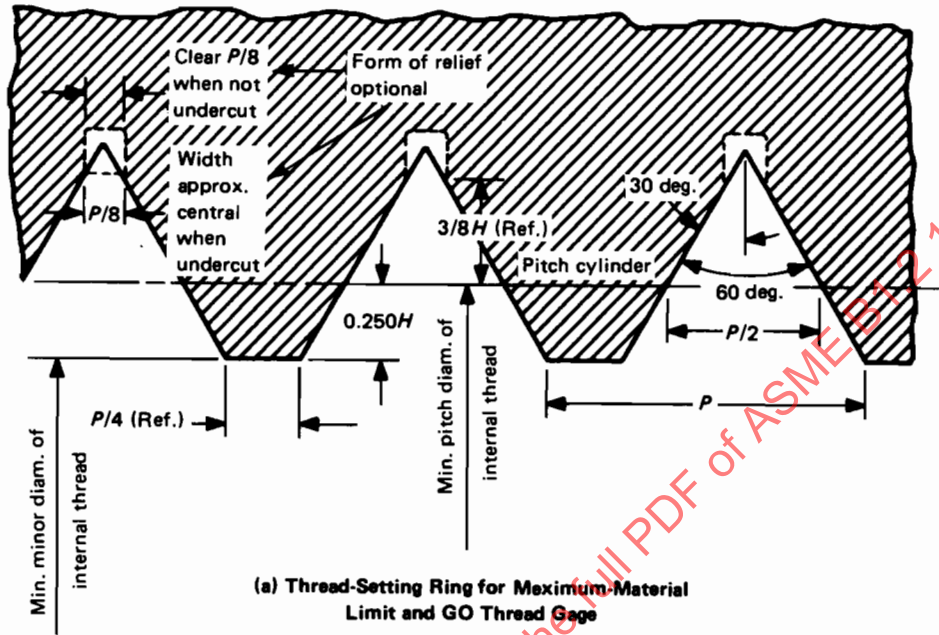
THREAD FORM OF SOLID THREAD-SETTING RING GAGES
